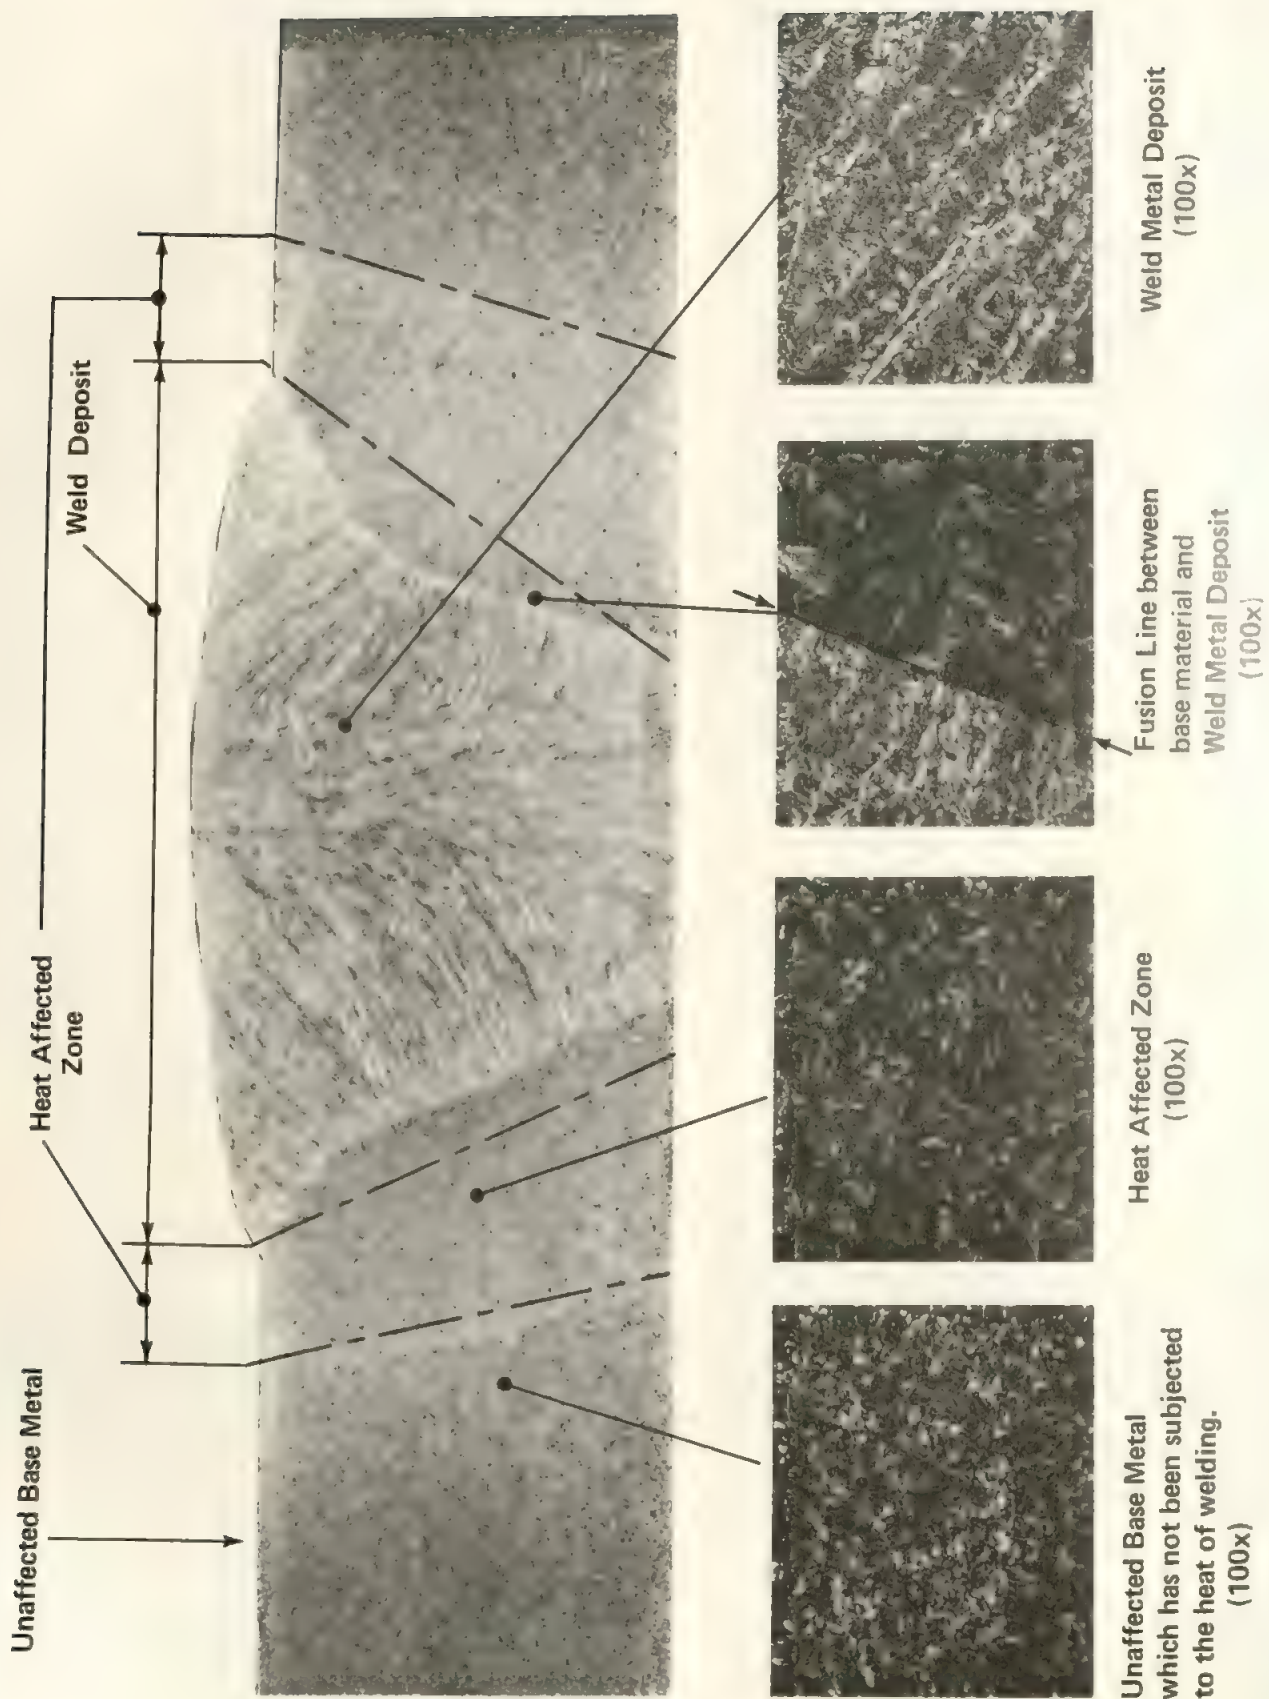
Micro structure at different parts of a weld.
